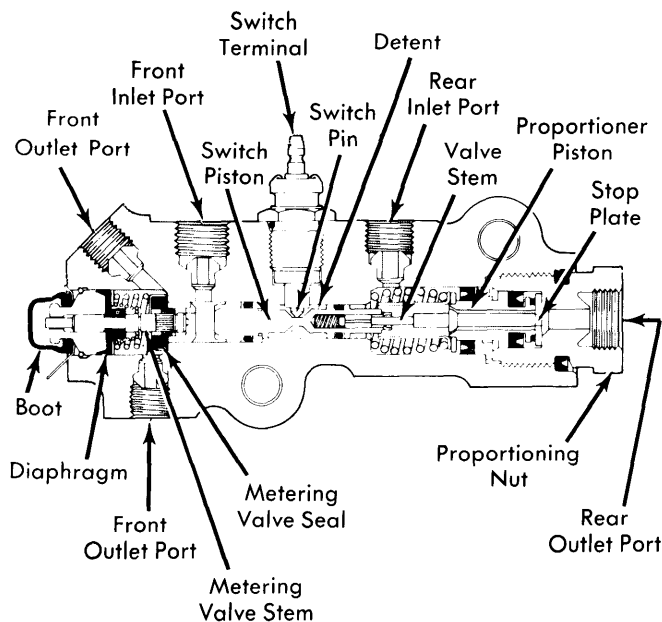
Sectional View of Typical Hydraulic Control Valve
